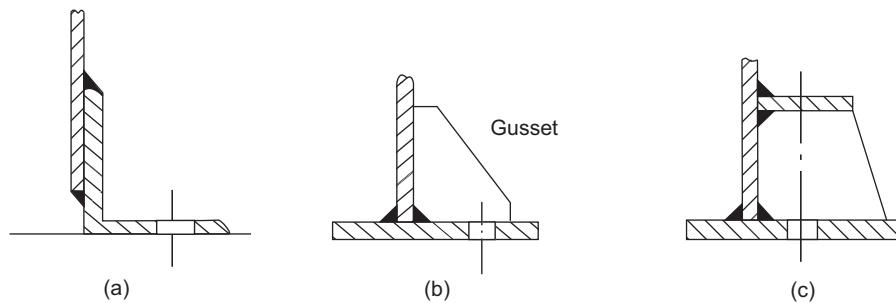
Flange ring designs. (a) Rolled angle. (b) Single plate with gusset. (c) Double plate with gusset.
